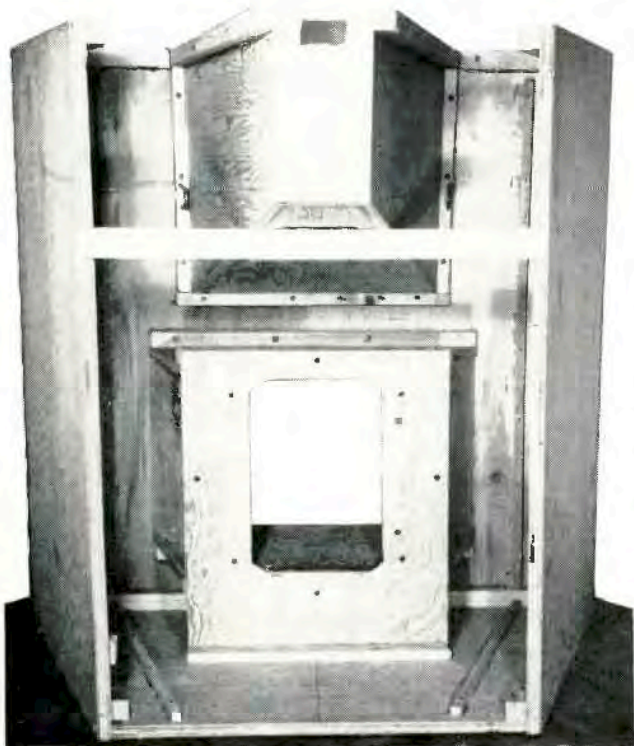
View of the rear of the lower cabinet showing method of assembling the various sections.
